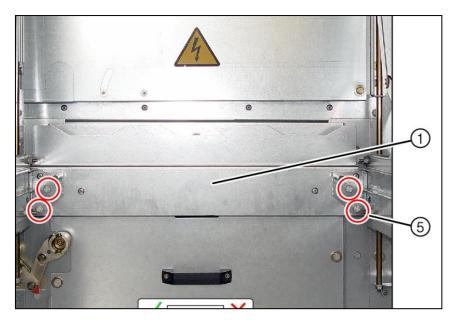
4 bolted joints on protection plate of switching-device compartment
